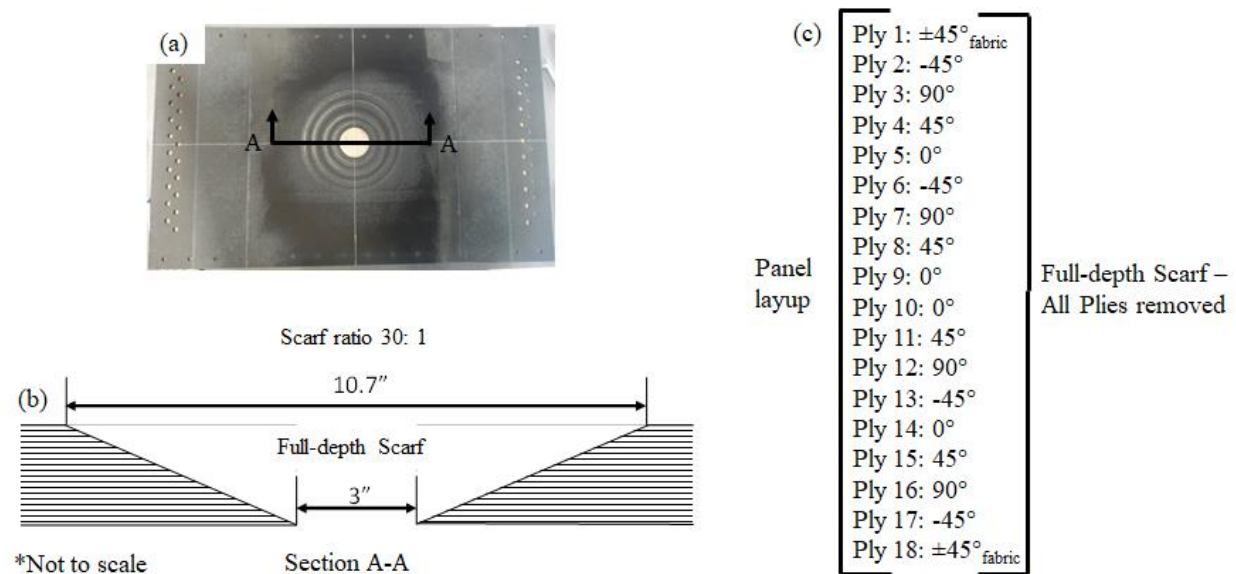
Details of full-depth scarf panels (panels 4 and 6)
